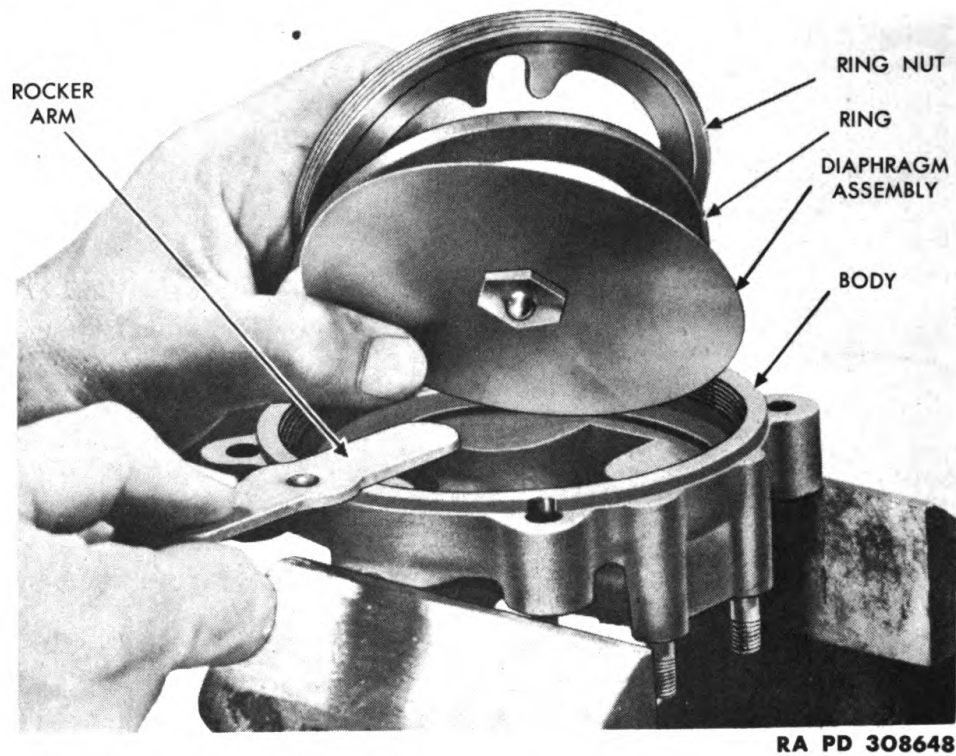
Removing Ring Nut, Ring, Diaphragm Assembly and Rocker Arm
